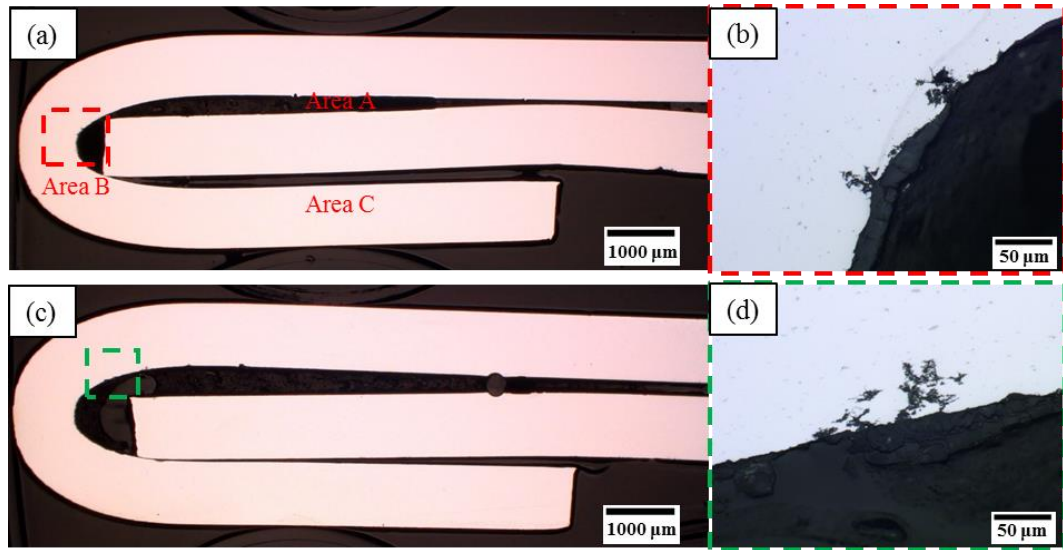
Cross-sectional LOM images of hem flange coupons after six weeks of Ford L-3190 exposure (a) AA6022 hem flange coupon, (b) higher magnification view of red frame; (c) AA6111 hem flange coupon and (d) higher magnification view of green frame.
